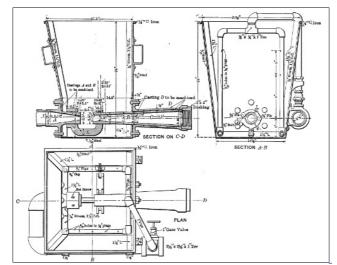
WASHINGTON AQUEDUCT, D. C., FILTRATION PLAN. EJECTOR SAND-HANDLING, SYSTEM.
